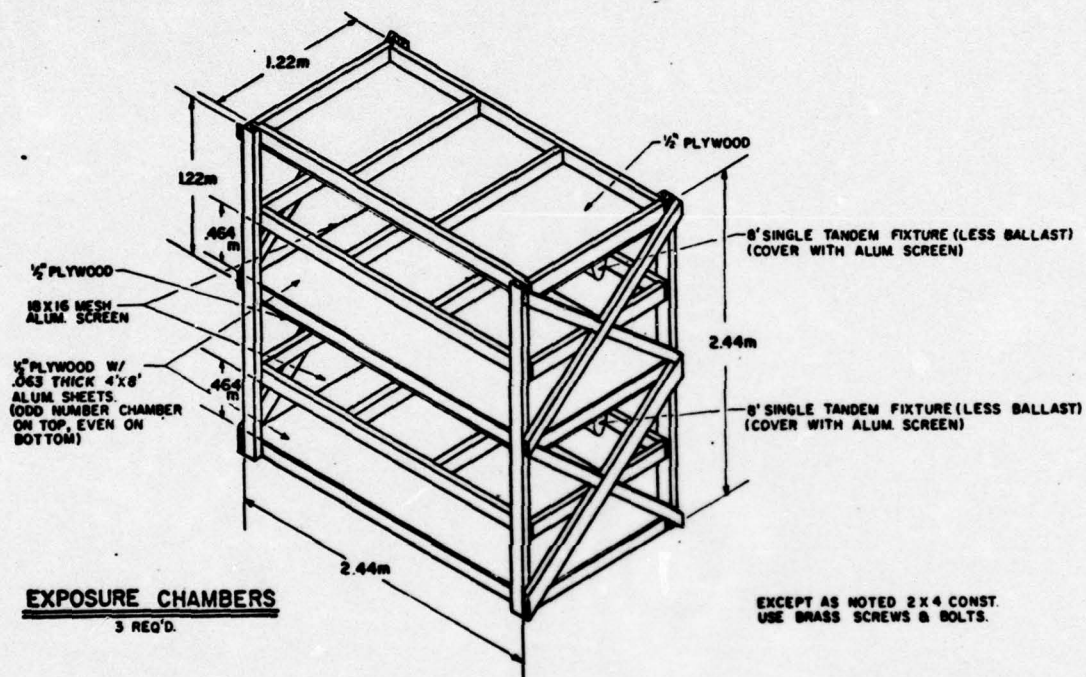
Drawing of Two Exposure Chambers (Contained in a Rack)
